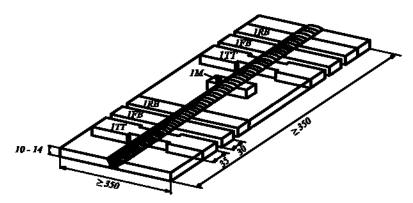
Butt weld test assembly for welding in various welding positions: specimens are designated according to 4.10.3.5. Edge preparation shall be single V or double V with 50° angle (refer to Table 4.10.3.3).
